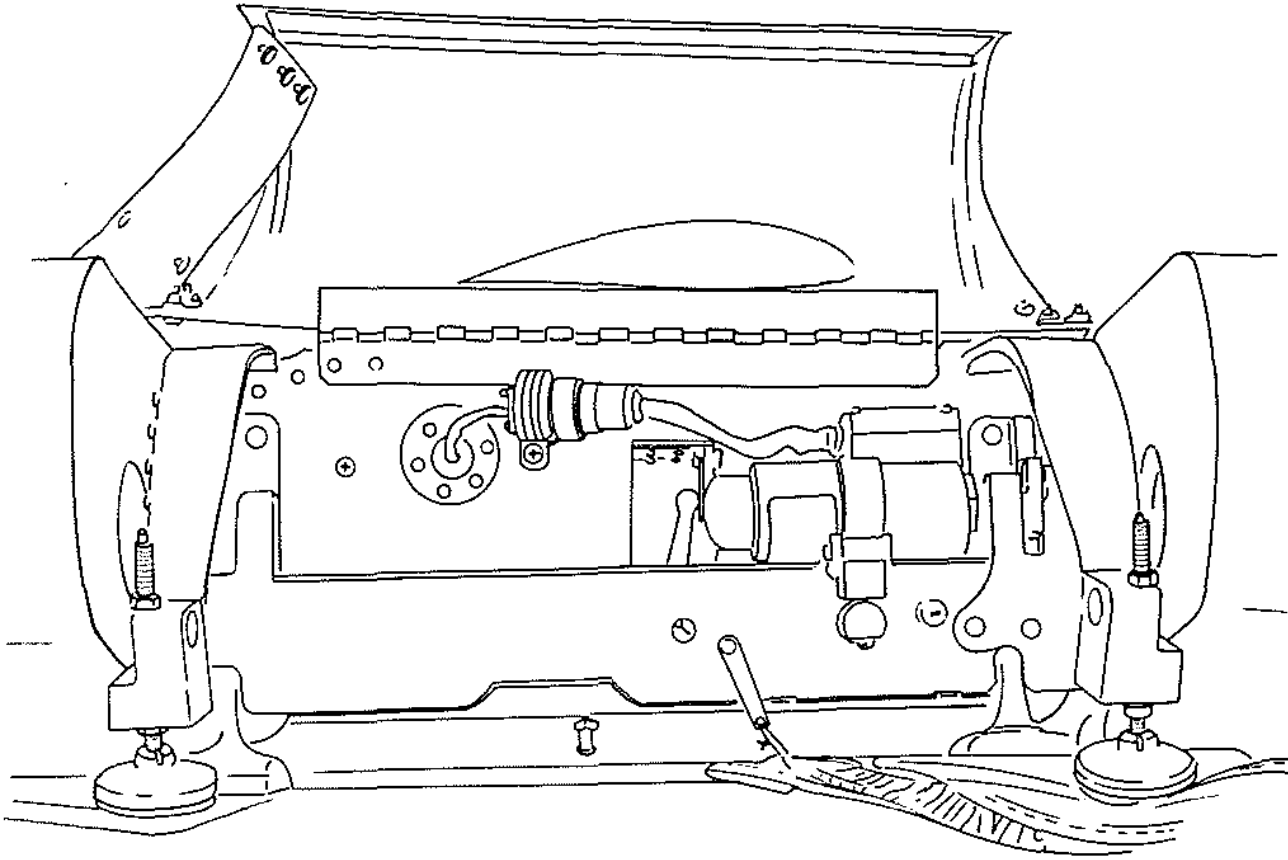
Proper External Auxiliary Fuel Tank To Bomb Shackle Installation
